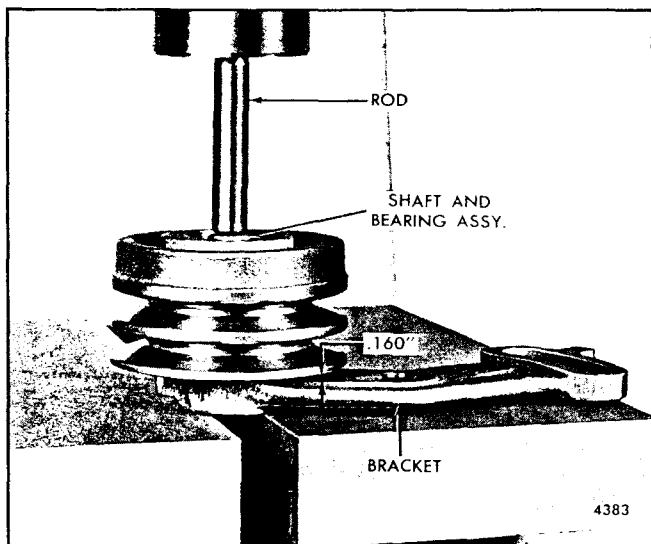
Installing Shaft and Bearing Assembly and Pulley in Bracket
